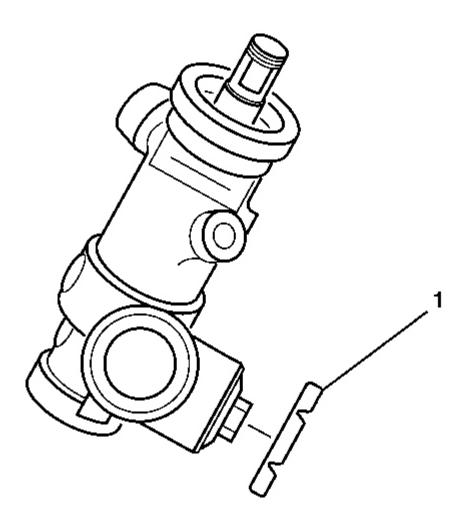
View Of Adjuster Plug Lock Nut (Rack & Pinion) Courtesy of GENERAL MOTORS CORP.
